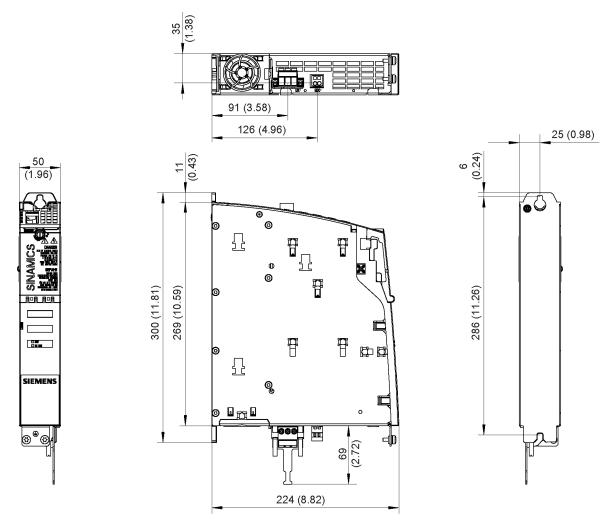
Dimension drawing of 3 A, 5 A, and 9 A Motor Modules Booksize Compact, all dimensions in mm and (inches); example: 5 A Single Motor Module
